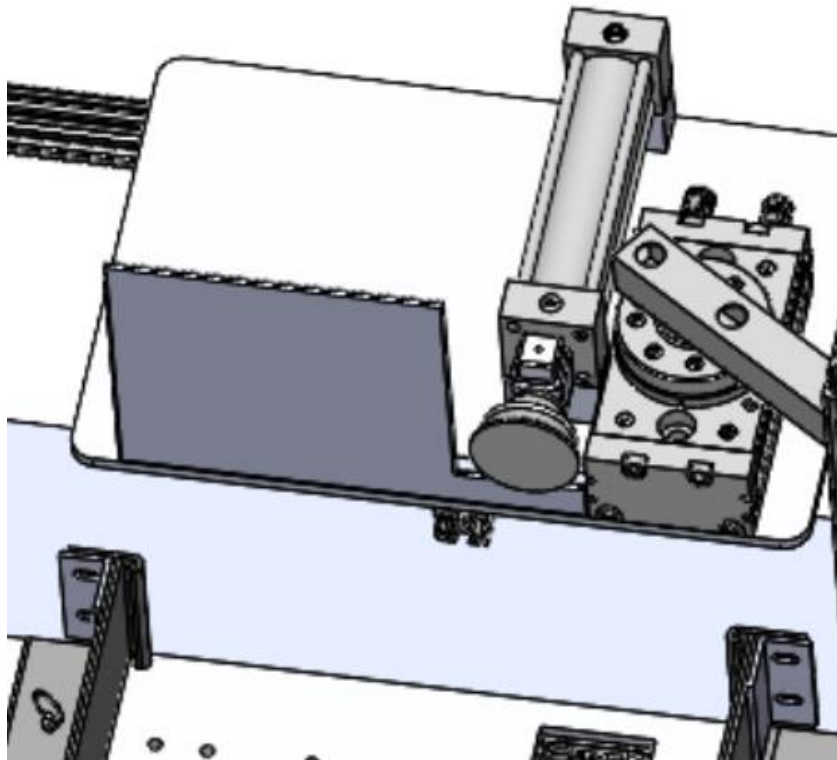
SOLIDWORKS assembly of the air-powered cylinder, with suction cup attached
